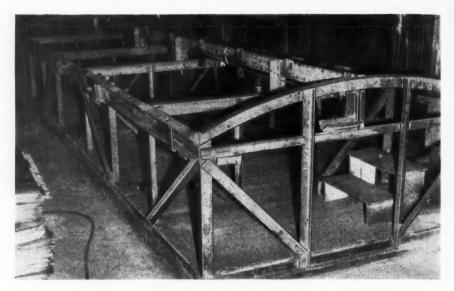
View of Semi-Welded and Riveted Constructed Roof Fitting and Tack Welding Jig.
